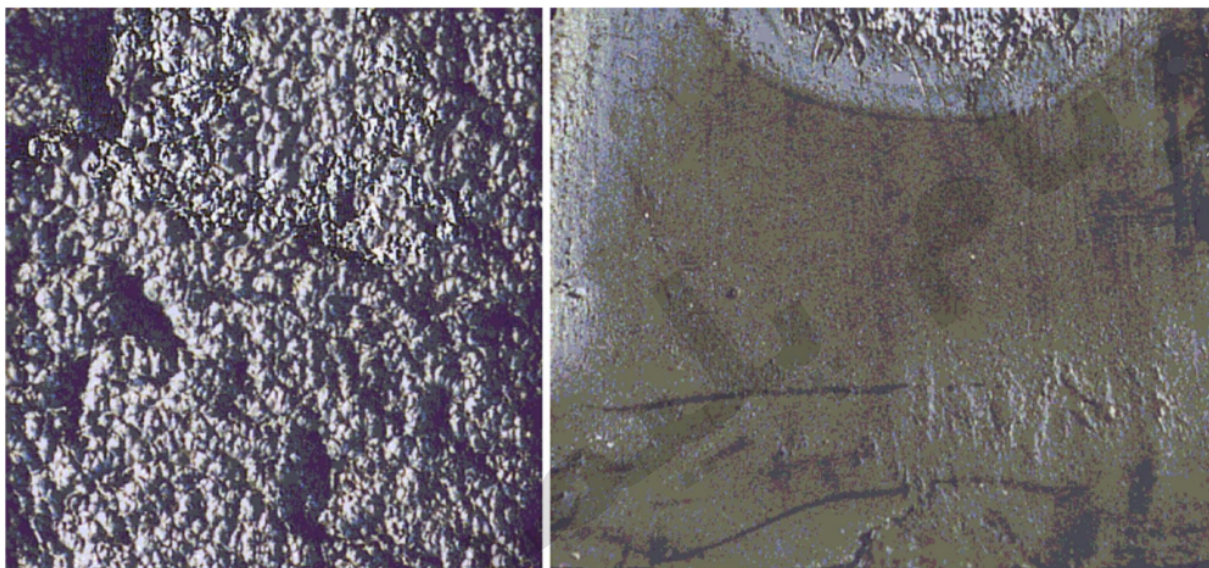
Typical example of ductile failure mode (left-hand picture) and brittle failure mode (right-hand picture)
